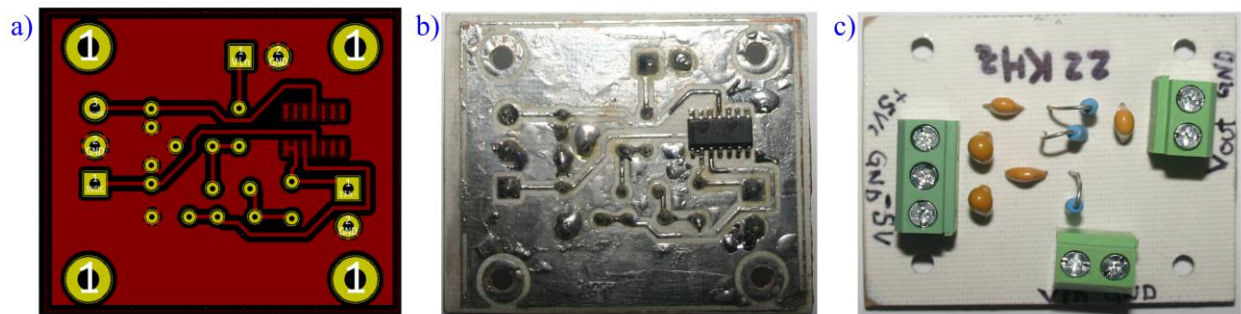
One-layer PCB of the circuit depicted in Figure 7a: a) Layout, b) bottom, and c) top.
